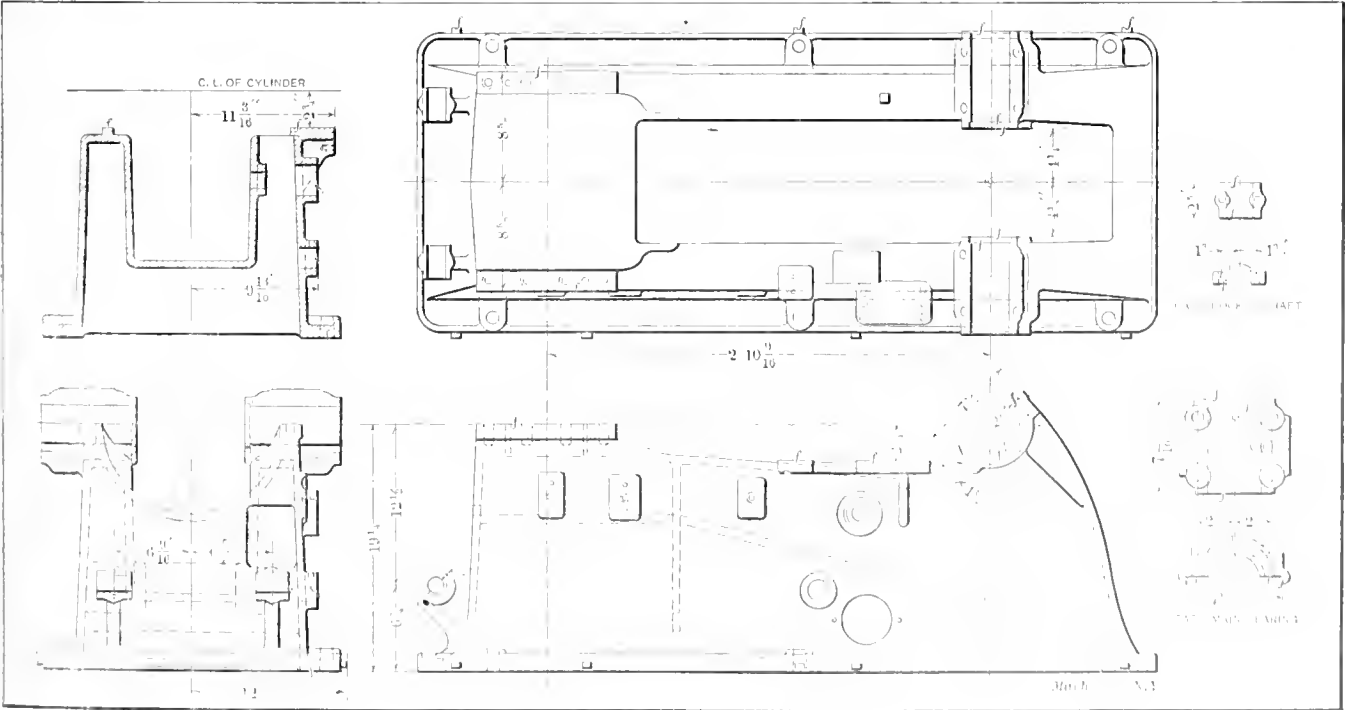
Plan and Elevations of a Bed for 6 1/4 by 11 Gas Engine
